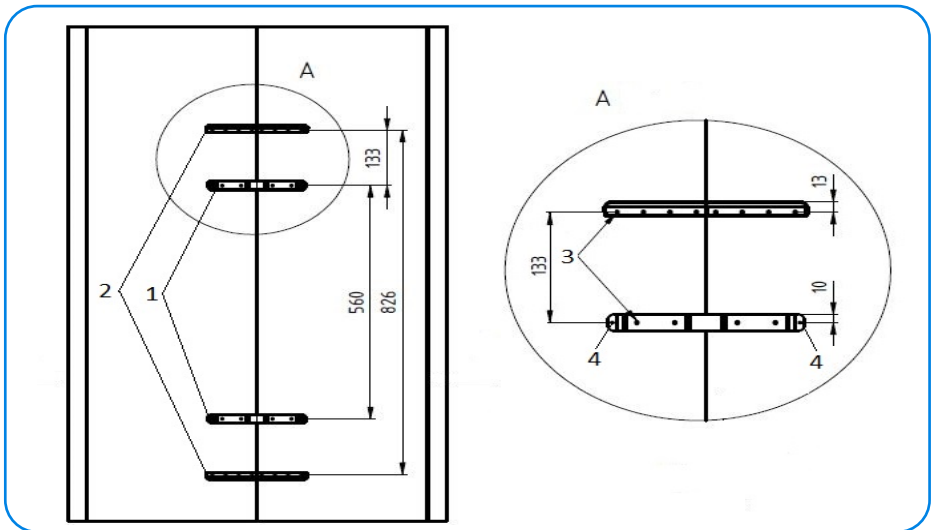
Arrangement of mounting brackets and covers for corner installation of VitalSun heater.
